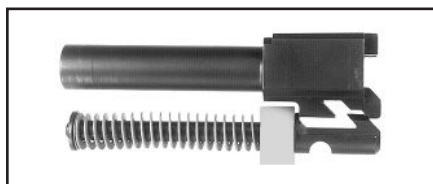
(relationship of recoil spring assembly to barrel locking block inside of slide)
